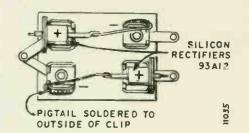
View of Fuse Holder Showing Position of Pigtail Type Selenium Rectifiers.
